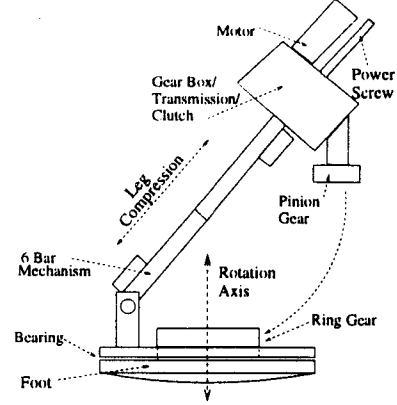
Schematic of steering mechanism. The self-righting mechanism and several components are omitted for clarity.
